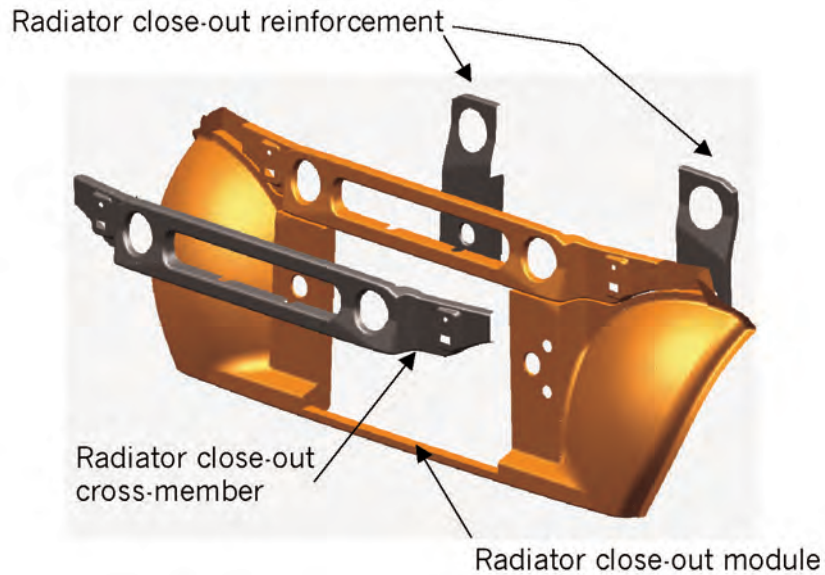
Radiator Closeout exploded view - Bayer hybrid steel/nylon technology
